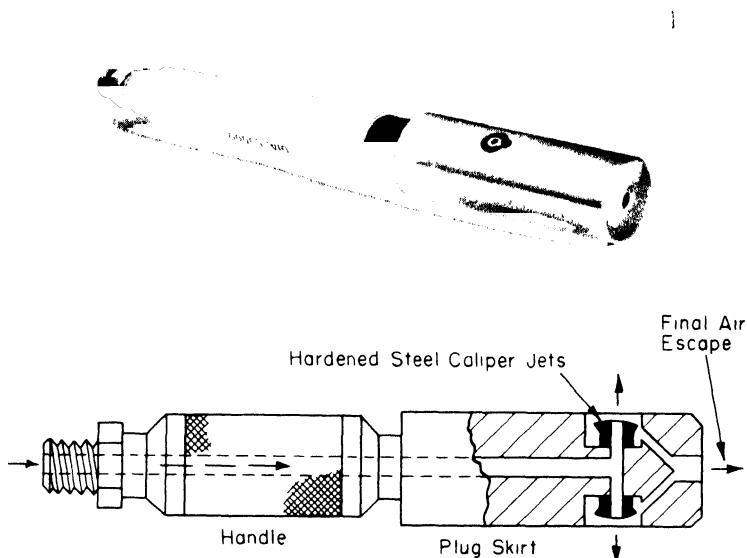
(Top) One type of measuring plug used with air gages. Fig. 3. (Bottom) Details of the measuring plug shown in Fig. 2.
